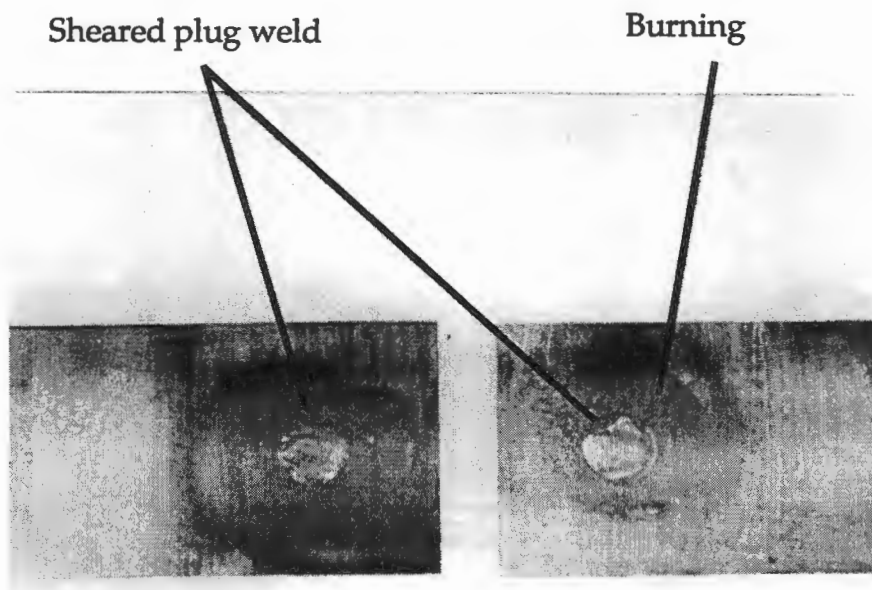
A macrograph showing a representative sheared plug weld; magnified 1 $\times$ .
